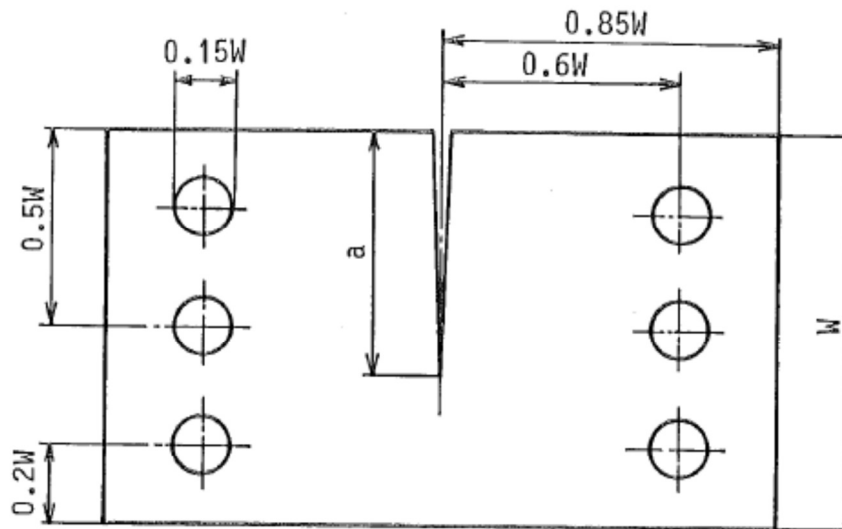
Specimen for Arcan fixture with single edge crack.
